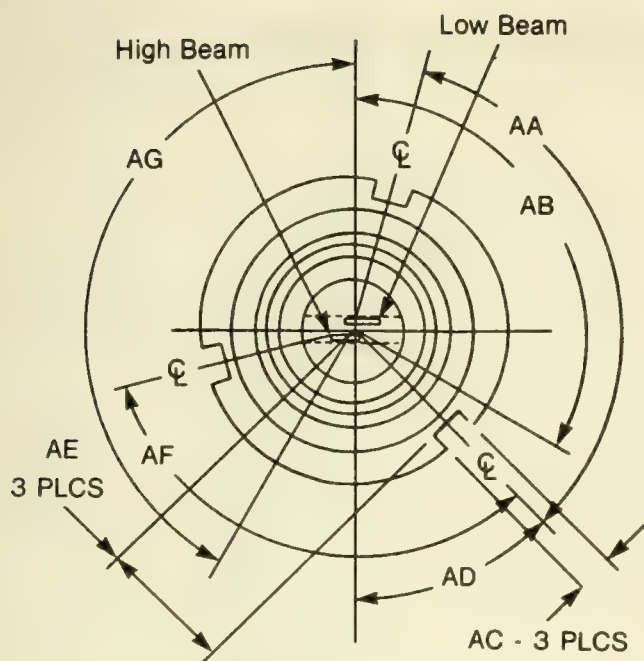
Interchangeability Drawing of Headlamp Bulb Assembly
